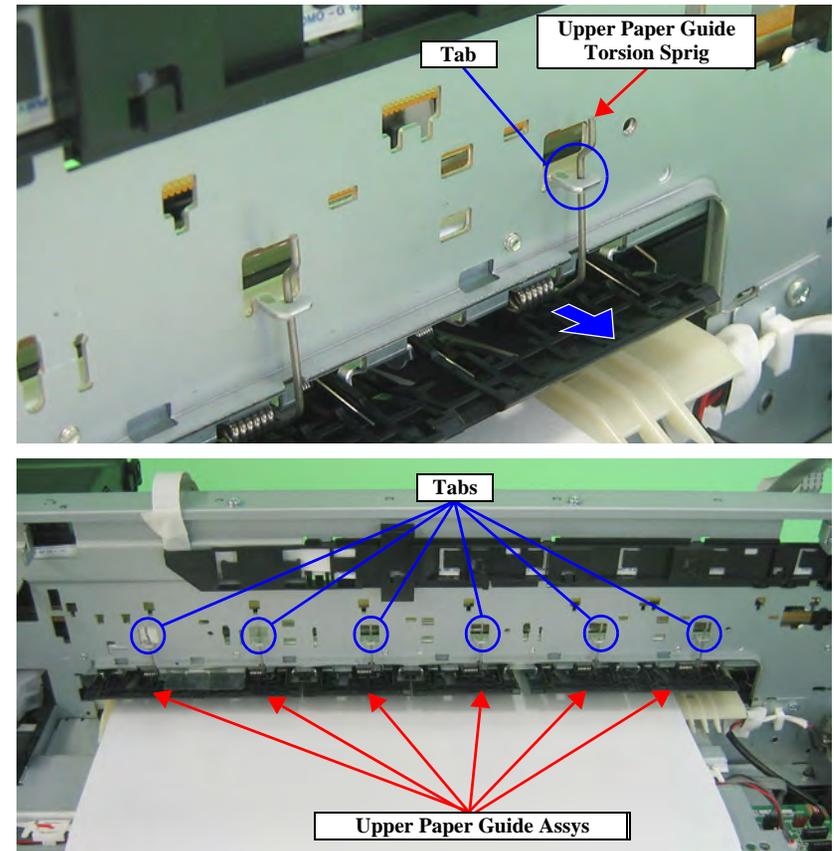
Removing the Upper Paper Guide Torsion Spring
